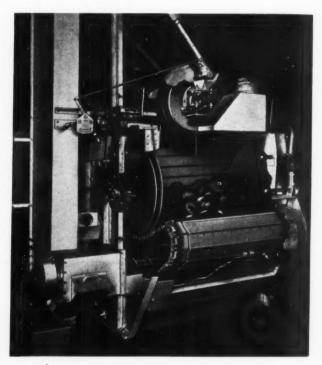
Tumbling action produced by apron conveyor presents all parts to the cleaning force
